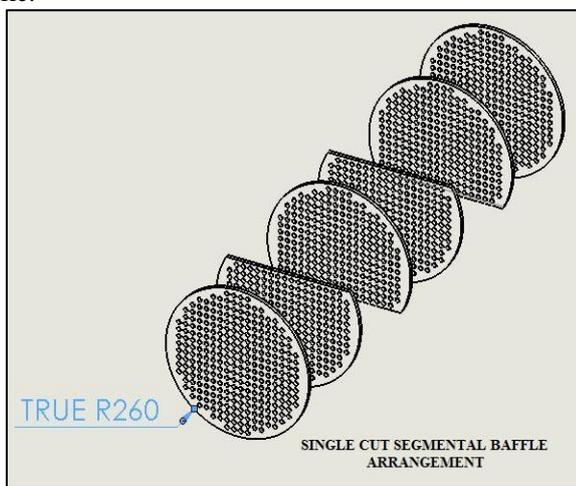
Single cut segmental baffle arrangement with tube sheets
